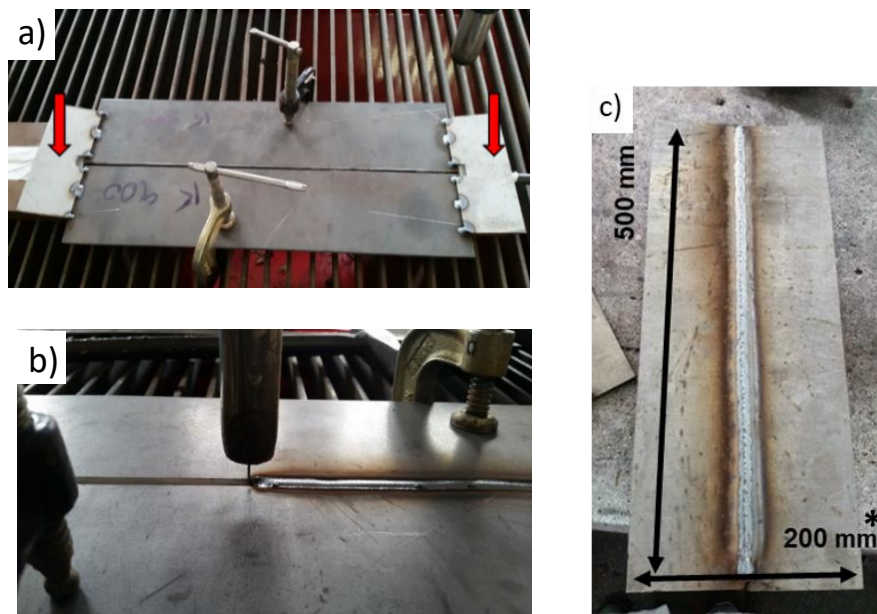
a) Apparatus before welding process, fixing two plates with 2 mm gap to prevent their movement during the welding process, b) during the welding and c) specimen after welding process.
